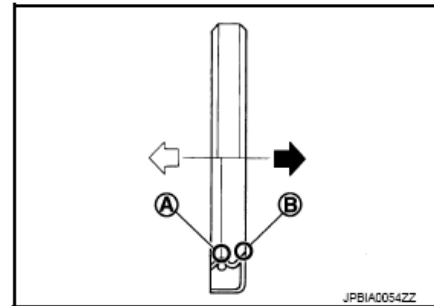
Identifying Oil Seal Lip And Dust Seal Lip
